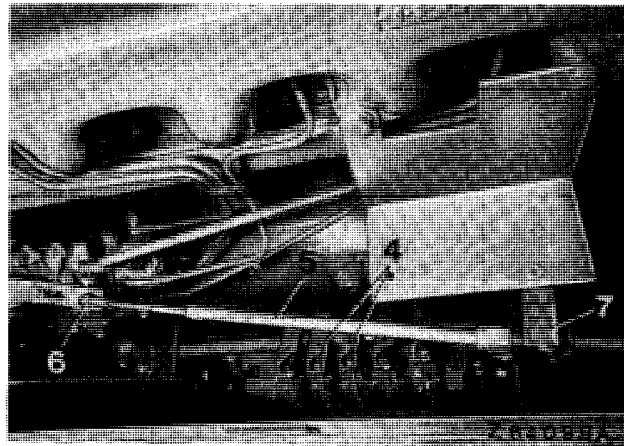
Preparing to Remove Engine at Roto-Diesel Fuel Injection Pump
